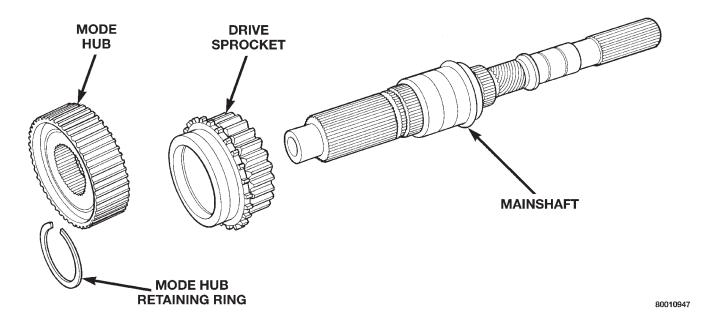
Mainshaft, Mode Hub, And Drive Sprocket
